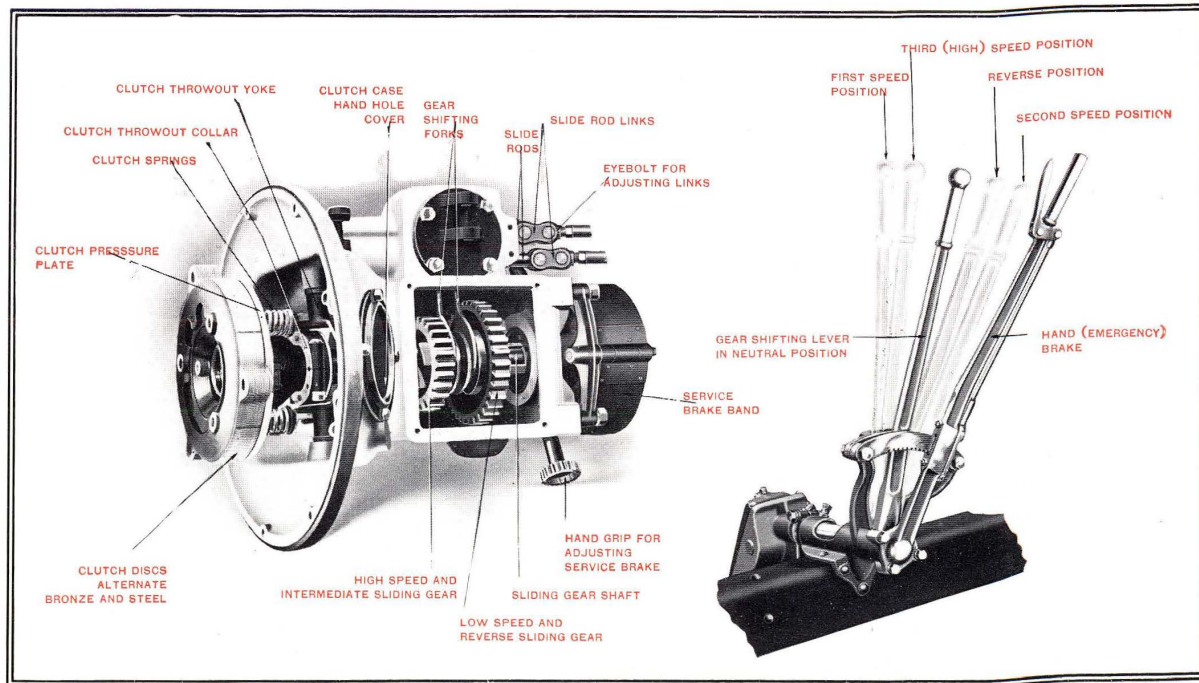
Movements of Gear Shifting Lever and View of Transmission and Clutch of Chalmers "30"
